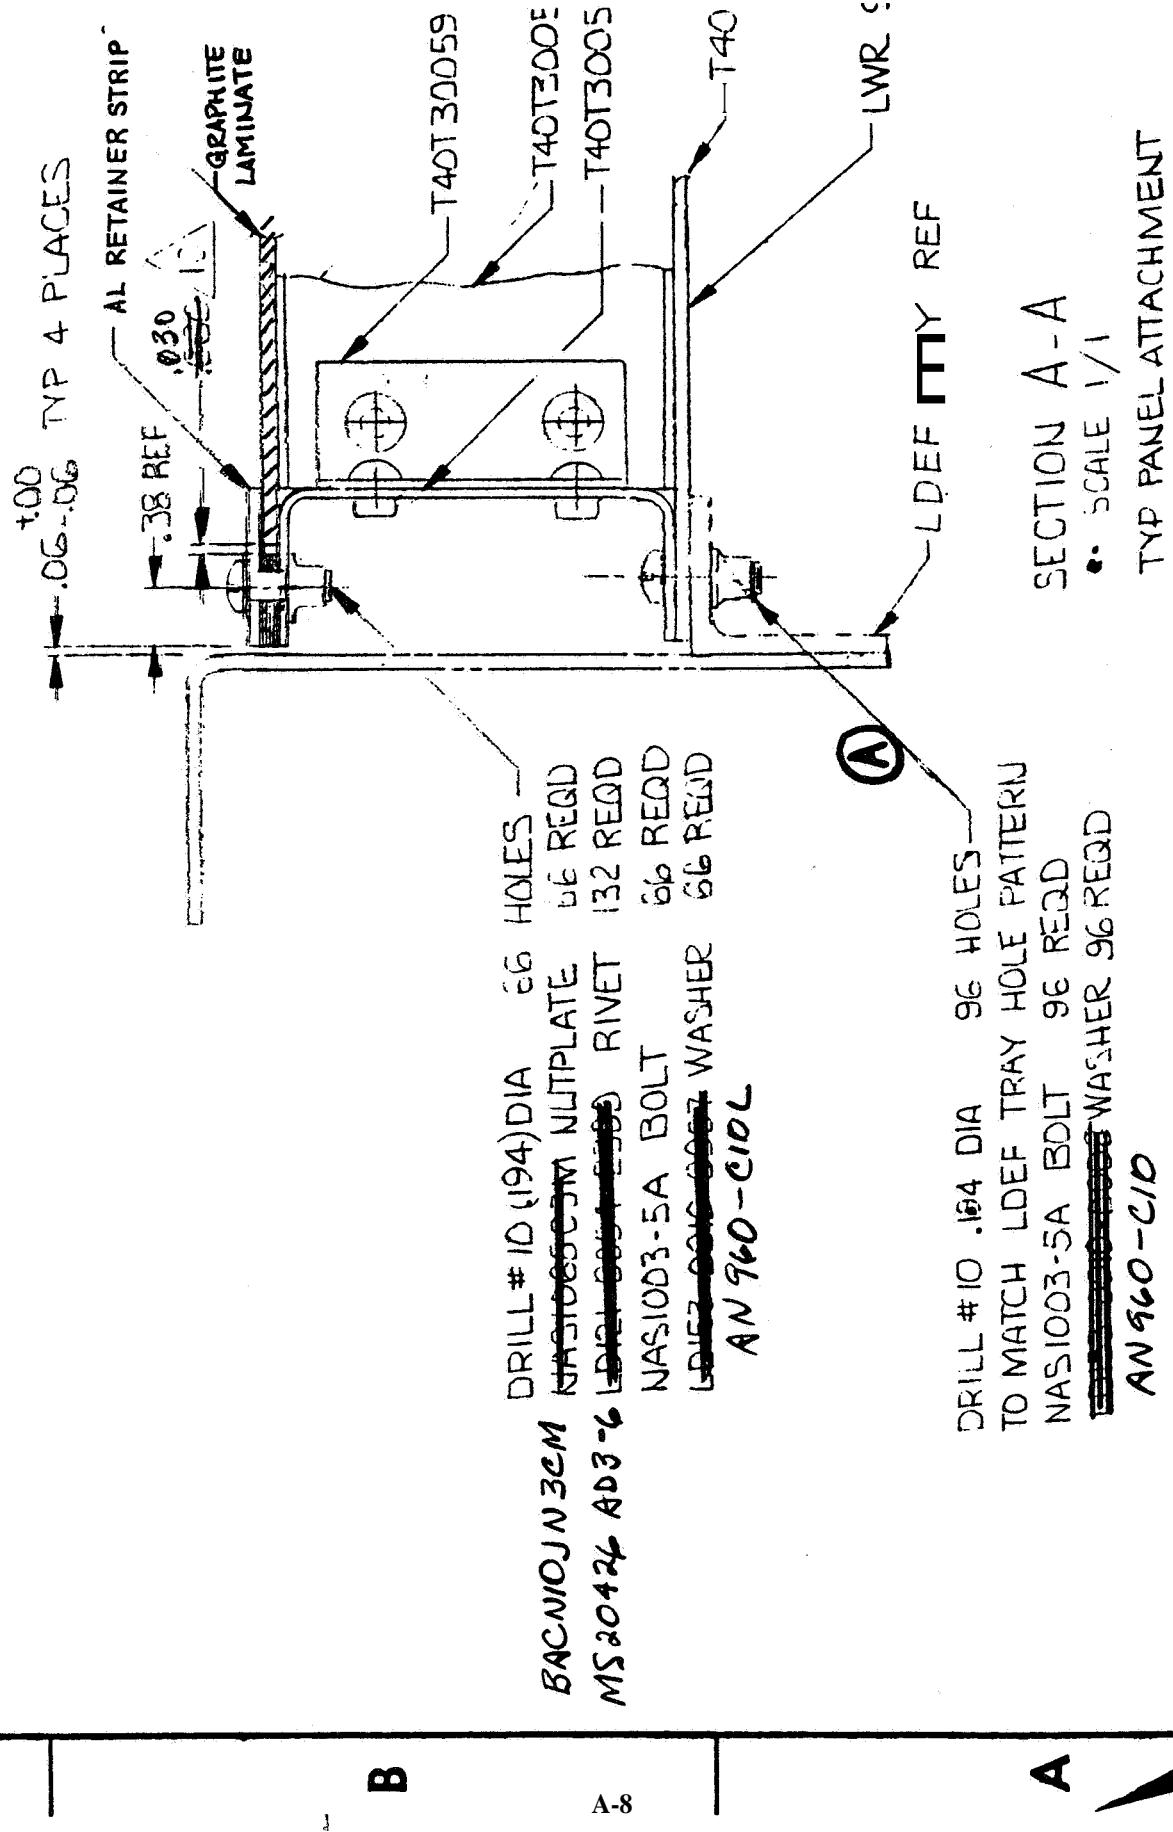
FASTENER COMPONENTS / ARRANGEMENT
